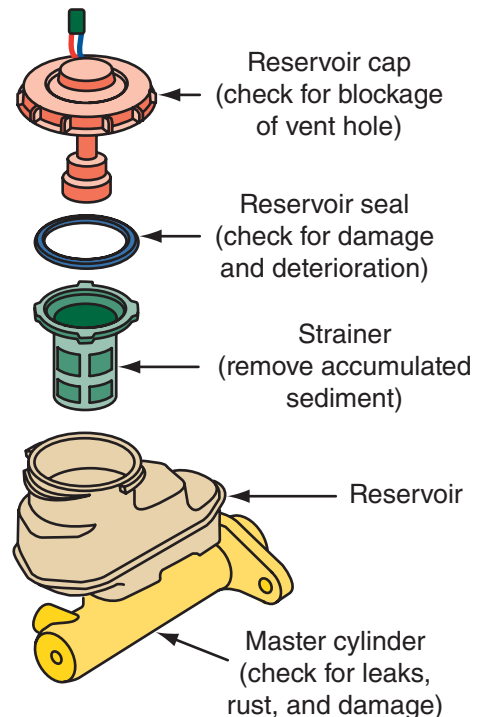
When inspecting a master cylinder, make sure to carefully check these items.
